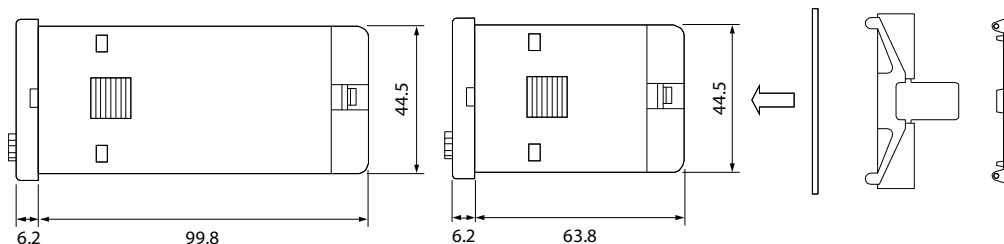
Dimensions of the case and installing of clip, gasket and terminal cover.
